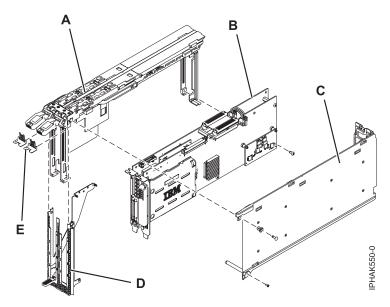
PCI-X double-wide, quad-channel Ultra320 SCSI RAID Controller and the main parts that make up the cassette assembly.
